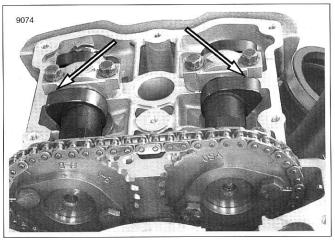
Front Cylinder 10 and 2 O'clock Cam Lobe Position
